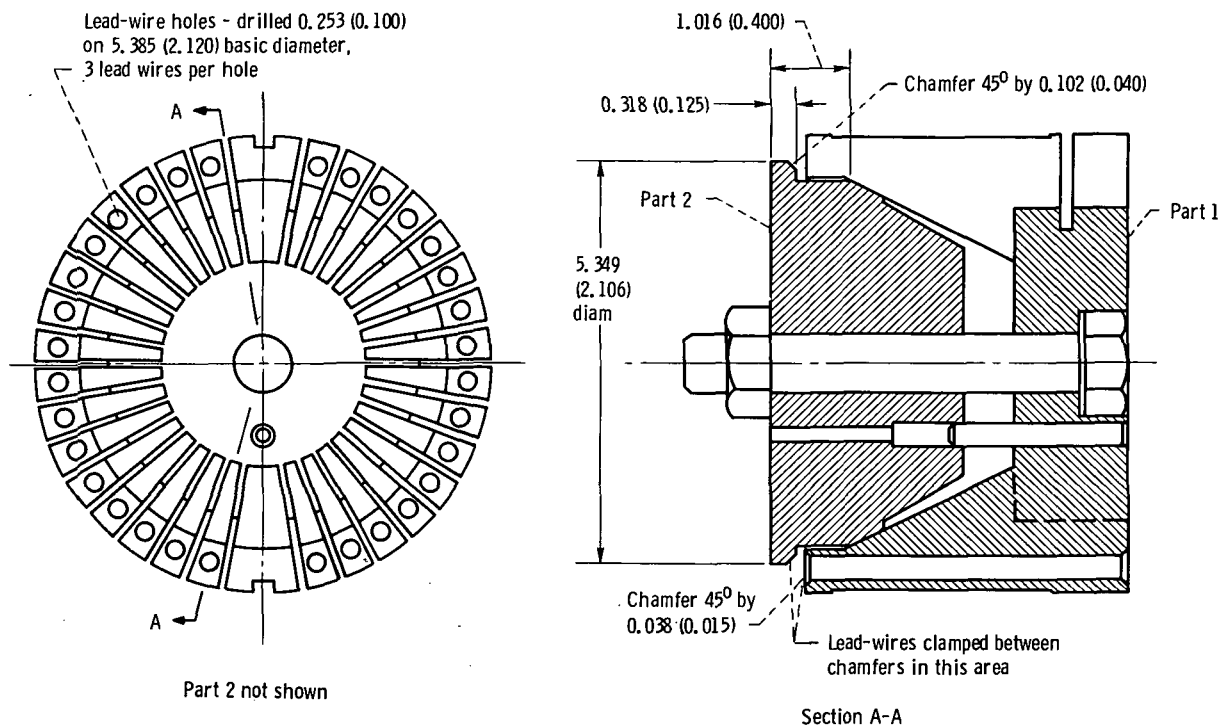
Strain-gage and lead-wire clamp assembly. (Drawing not to scale.)
